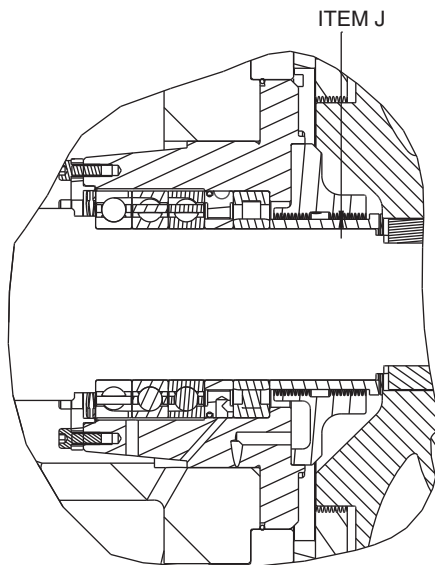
Compressor Fits and Clearances — Two-Stage Compressor, Frames Size 6 and 7 (cont)
